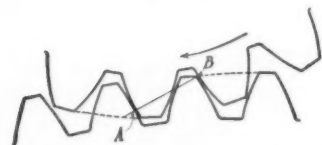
DELAYED ENGAGEMENT OF MATING TEETH. NORMAL PITCH SHORTER ON DRIVEN THAN ON DRIVING GEAR
